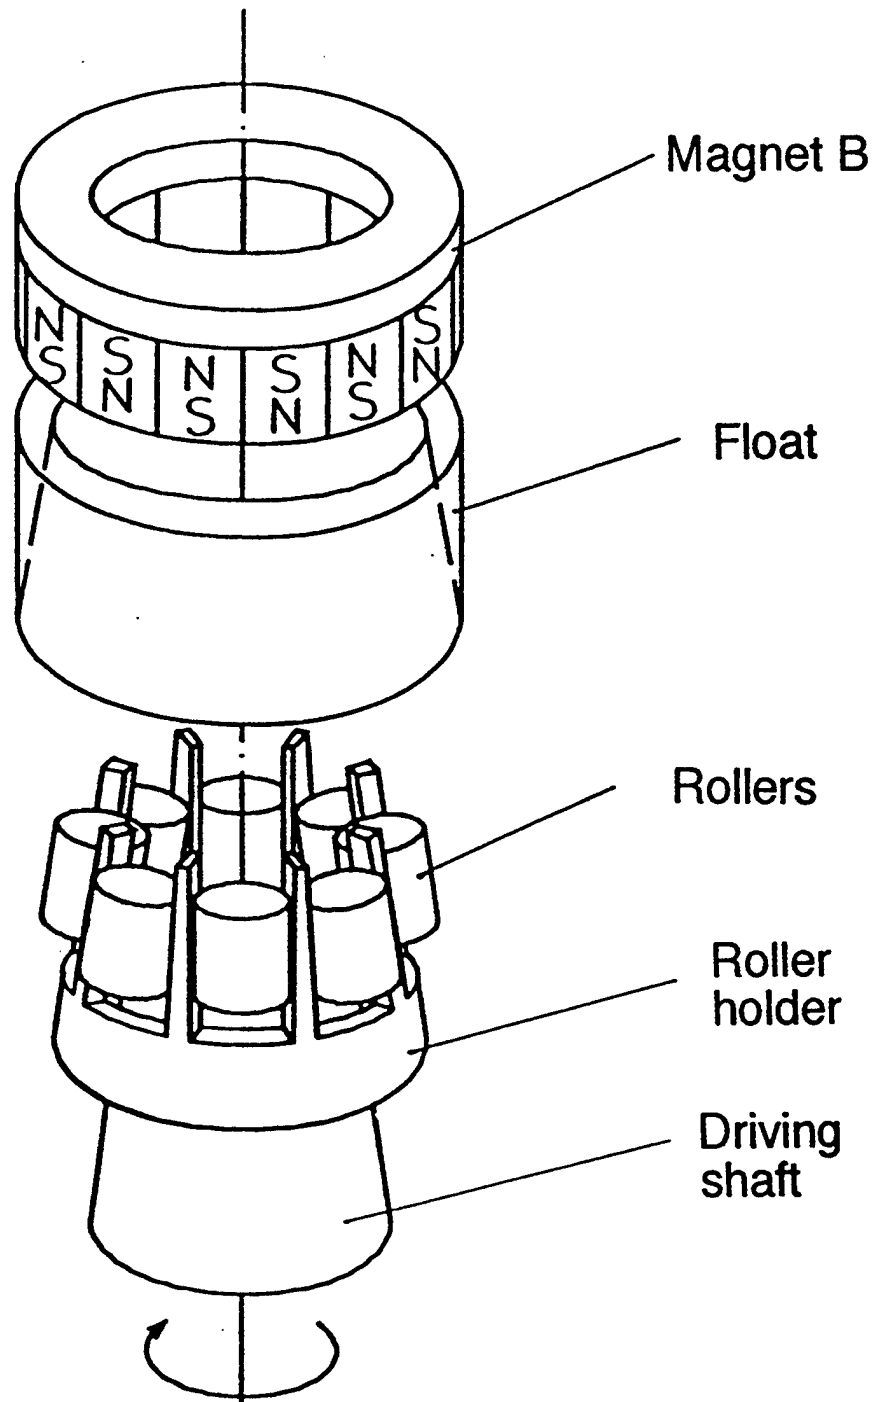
Assembly way of Magnet B, Float, Rollers, Roller holder and Driving shaft
